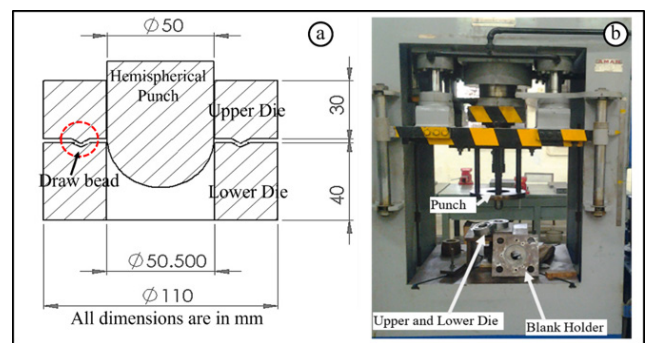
Experimental setup of stretch forming tests; (a) schematic diagram of stretch forming tool and (b) stretch forming machine
